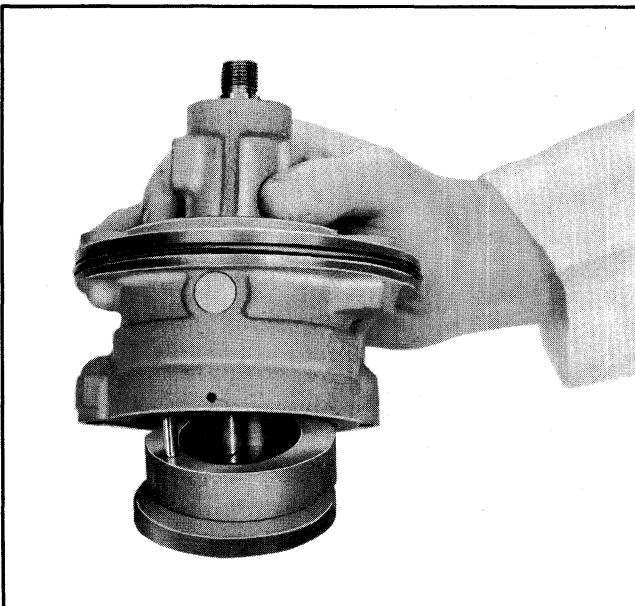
A-44 Pressure Plate and Rotor Ring Removed
